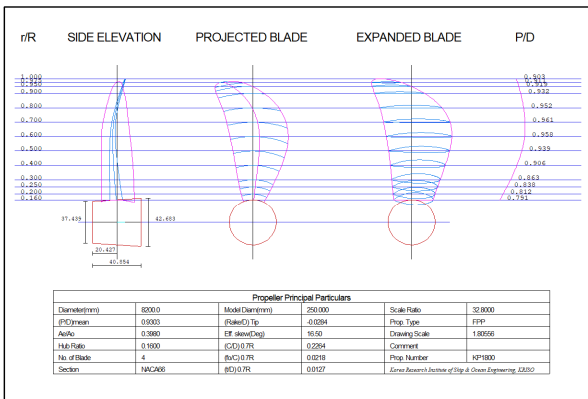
Drawing of the propeller(KP1800, KP1801)
